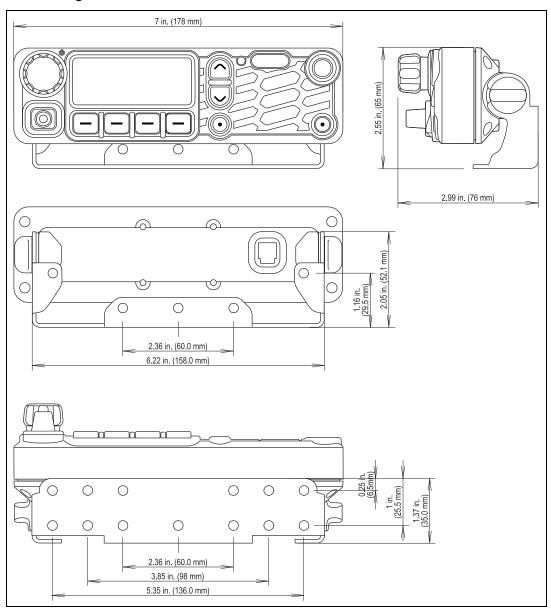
TCH4: Dimensions of Remote Color Control Head Installation
